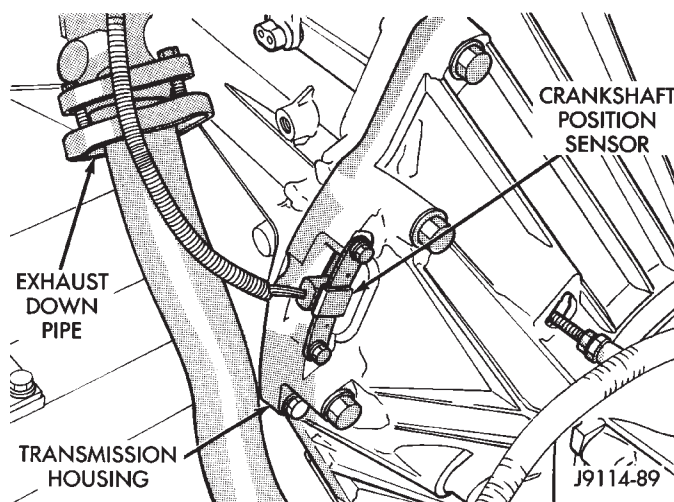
Crankshaft Position Sensor—2.5L 4-Cyl. Engine—Typical
